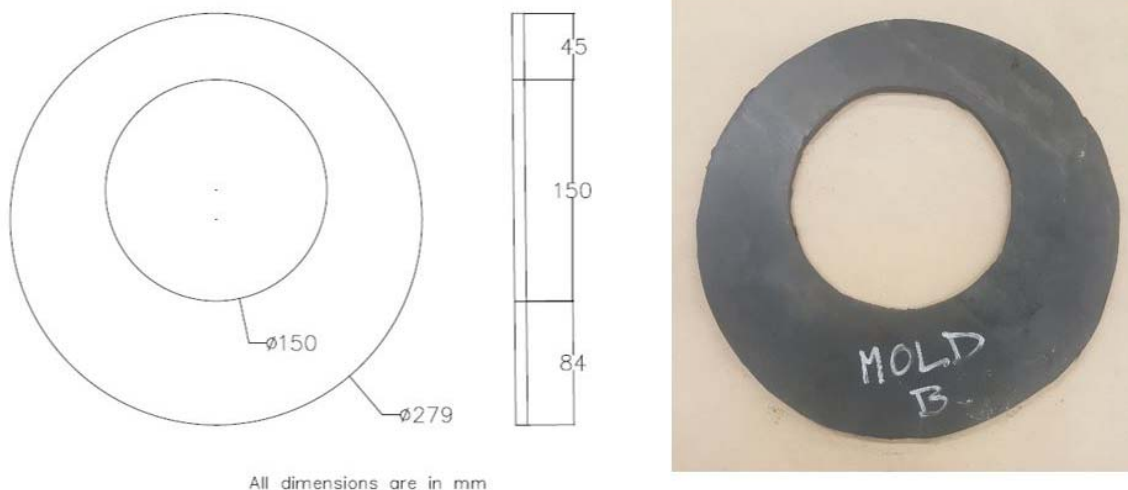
Schematic (left) and photograph (right) for Hobart N-50 disk specimen holder.
